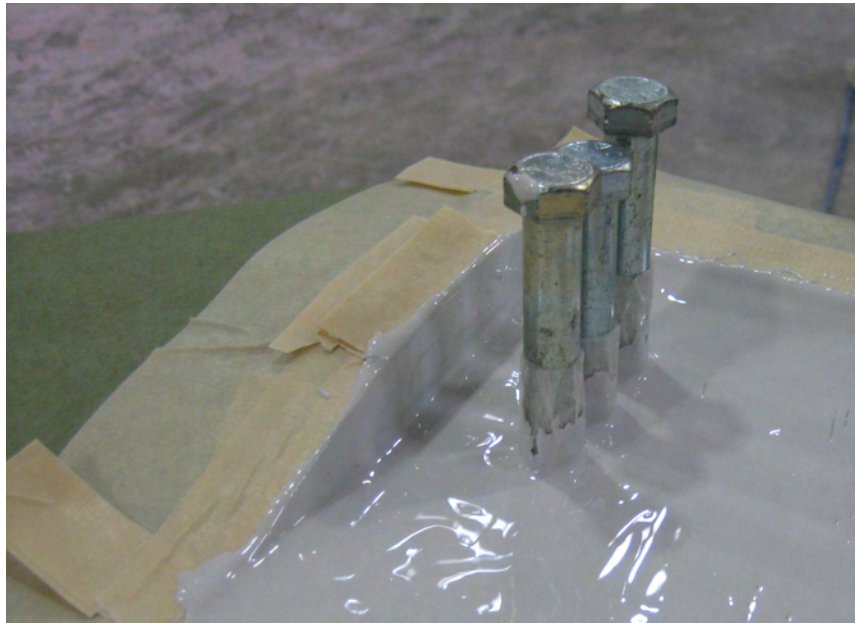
Gel coat applied - prior to bolt and tape removal.
